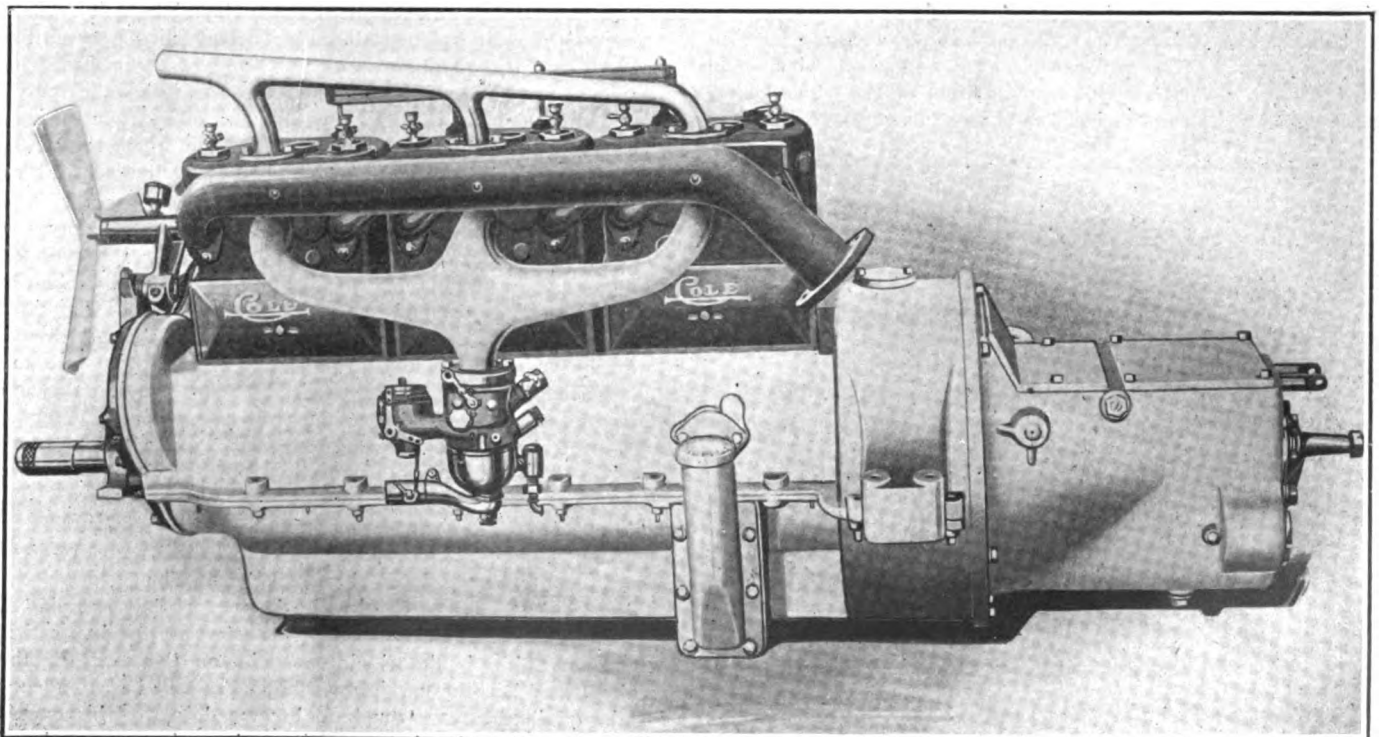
Left side of the six-cylinder Cole motor, showing unit construction and the mounting of the new Schebler carburetor
